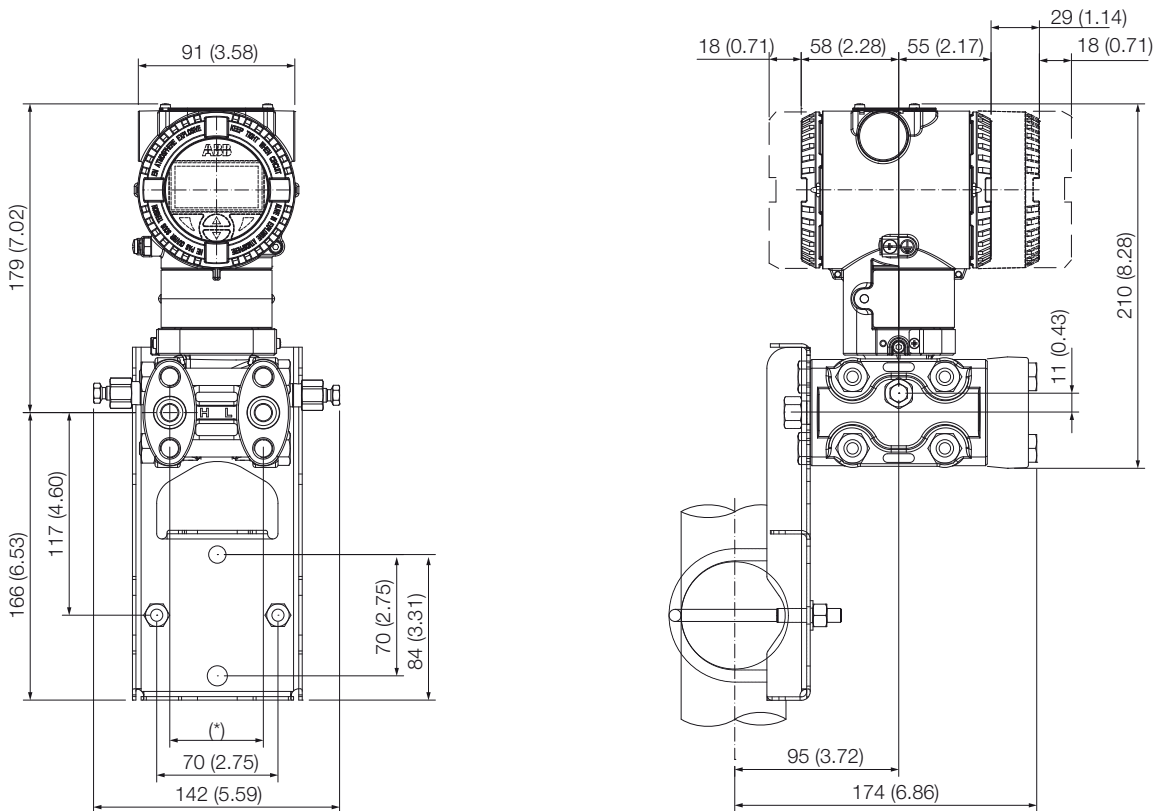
Transmitter with horizontal flanges on flat bracket for vertical or horizontal 60 mm. (2 in.) pipe mounting
